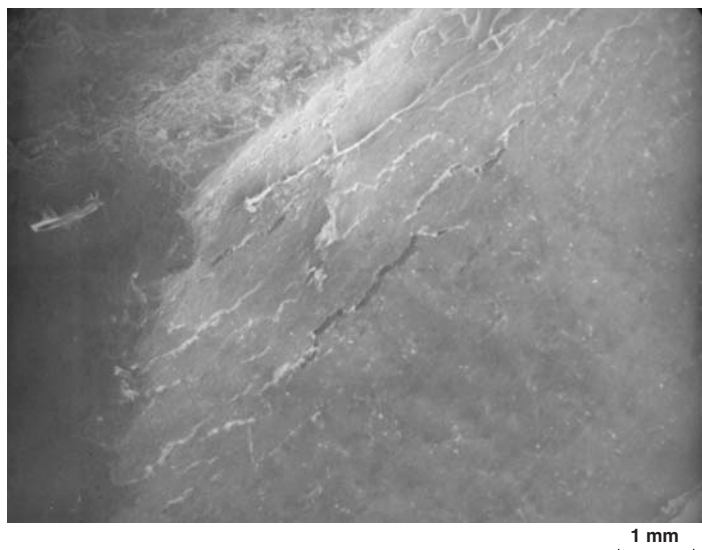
Circumferential cracks near the fracture surface
